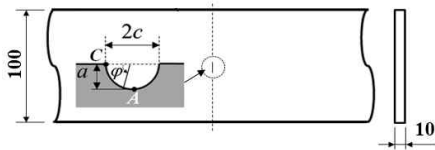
Schematic diagram of a finite plate with electric discharge machining crack
